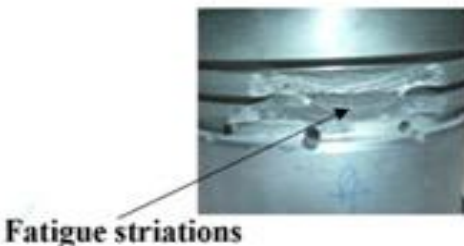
A cracked engine piston in upper portion of piston pin [34].
